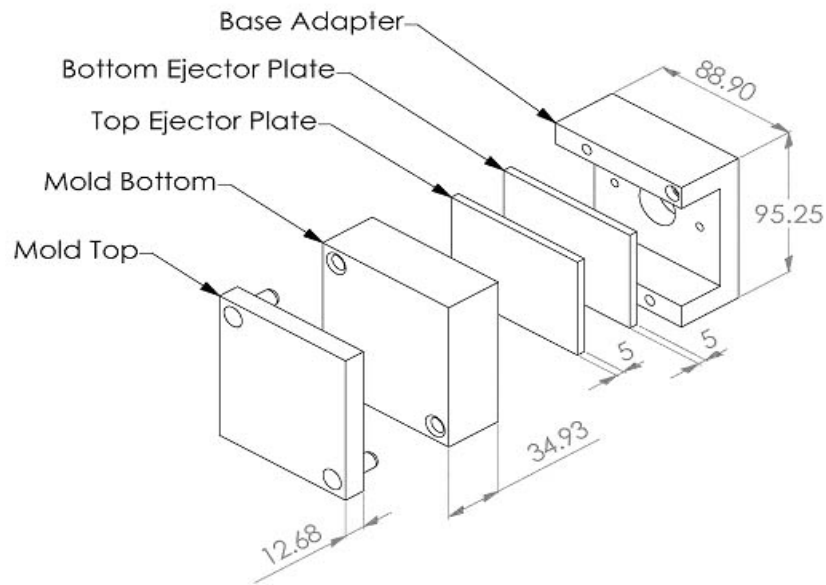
Mold blank and its parts before machining (units are in mm)[16]
